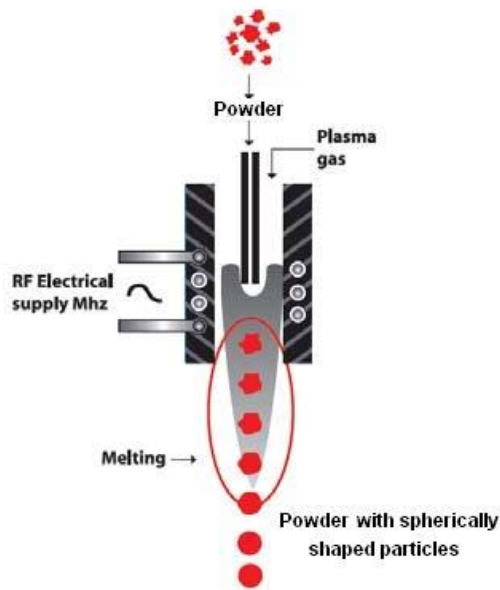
Principle of surface-welding with RFI-plasmotron
